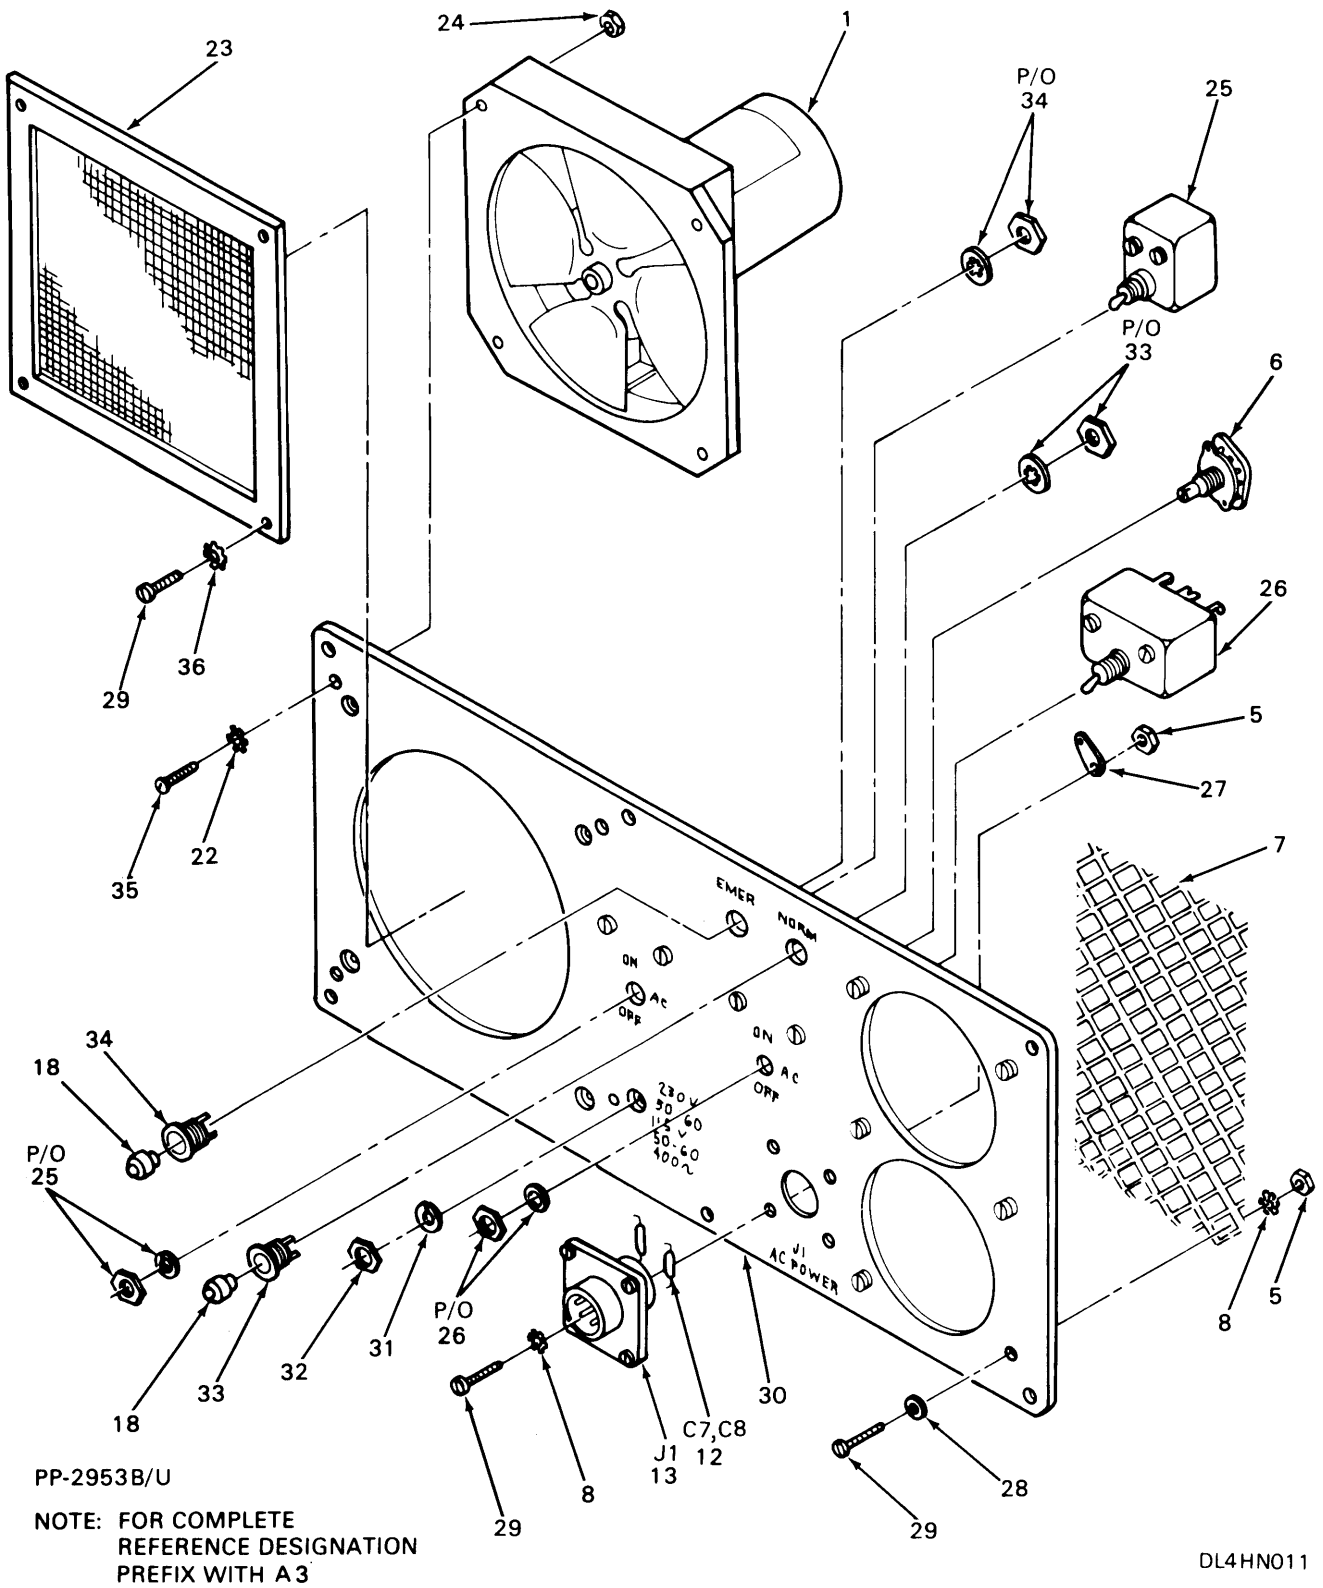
Front Panel Assembly (A3) (Sheet 2 of 3)
